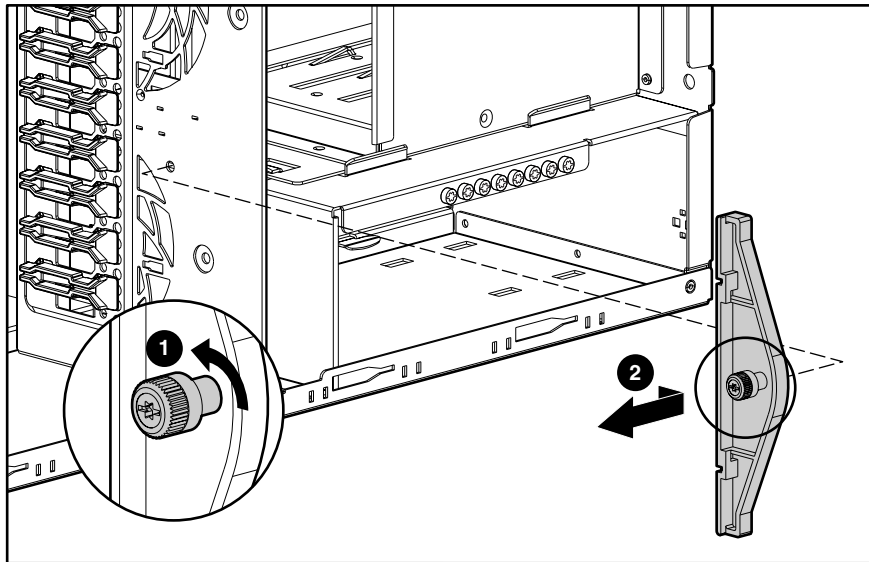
Removing the expansion board (Server Feature Board) retainer
